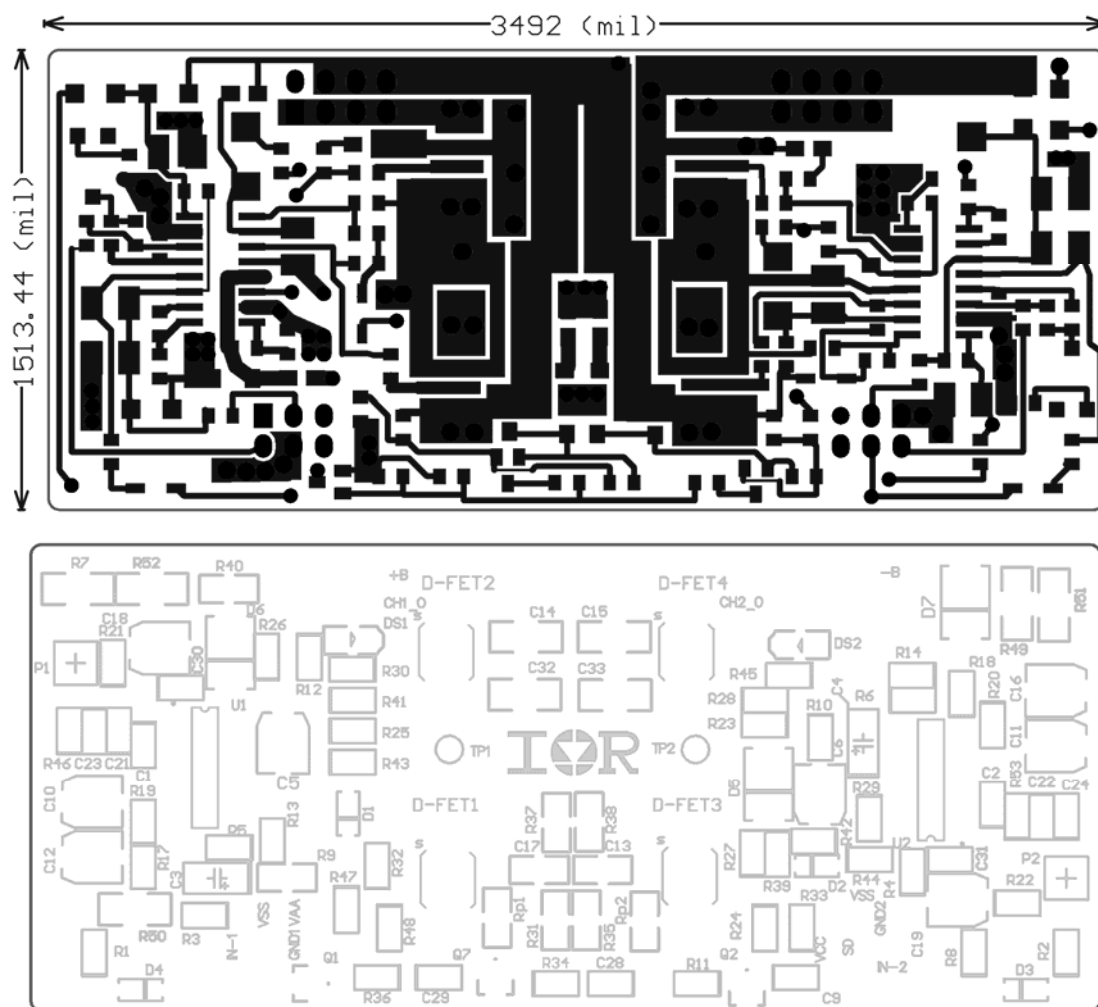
PCB Layout – Top-Side Solder-Mask and Silkscreen
